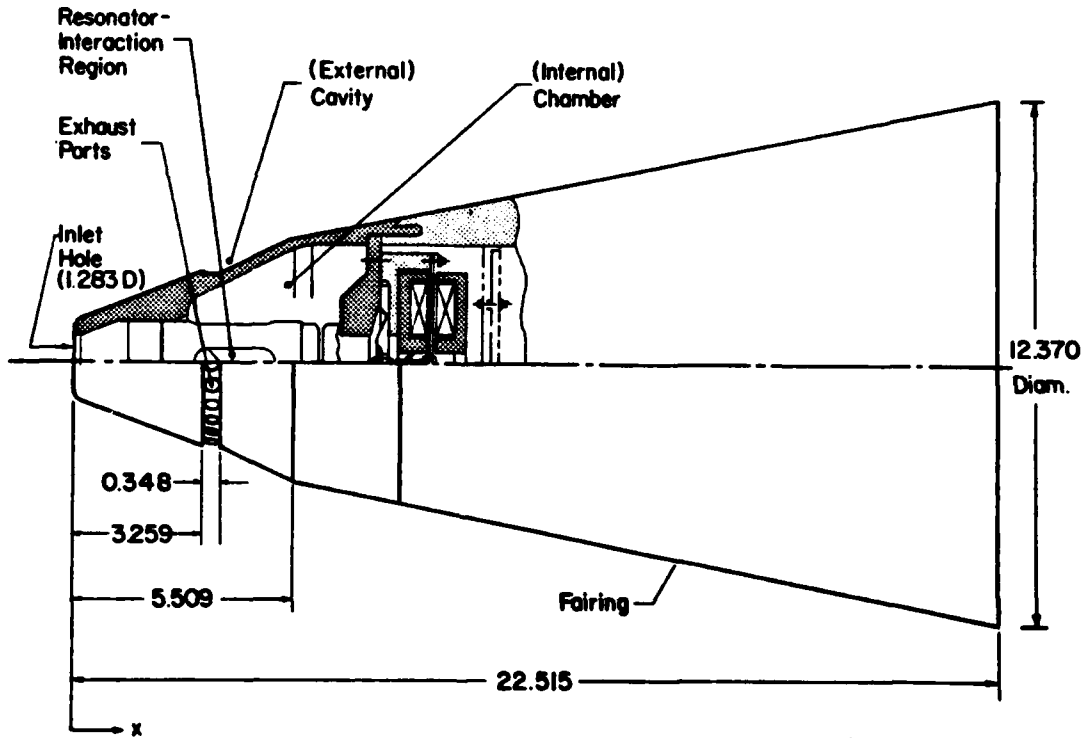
Sketch of the Army/MLRS Fluidic-Generator Fuze-Assembly.
